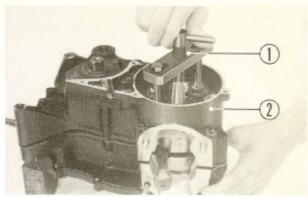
① Crankcase disassembly tool ② Left crankcase
